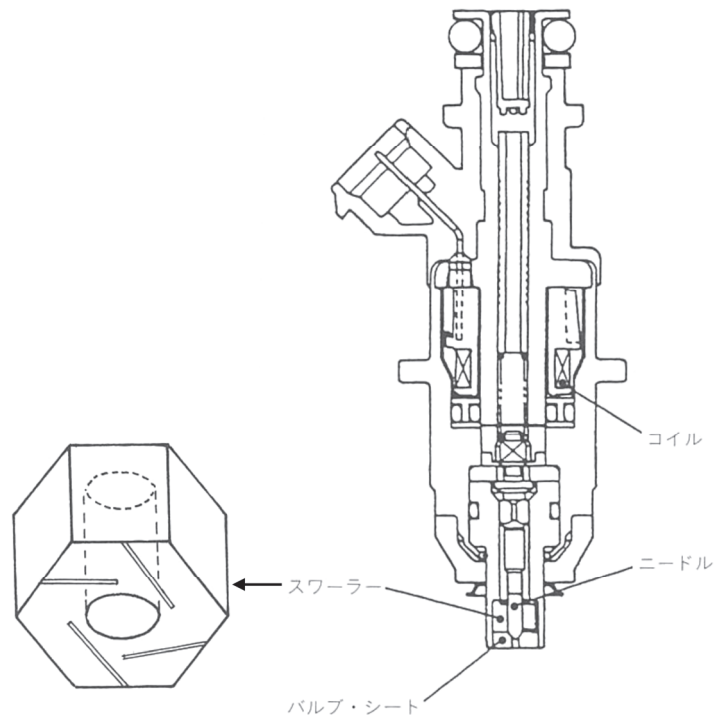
High Pressure Fuel Injector for Mitsubishi GDI Engine
